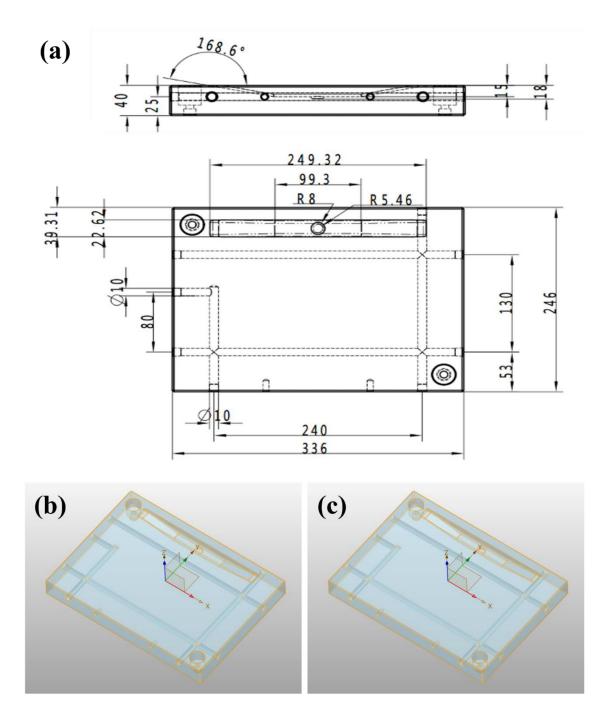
(a) 2D and (b) and (c) 3D drawings of the drag
